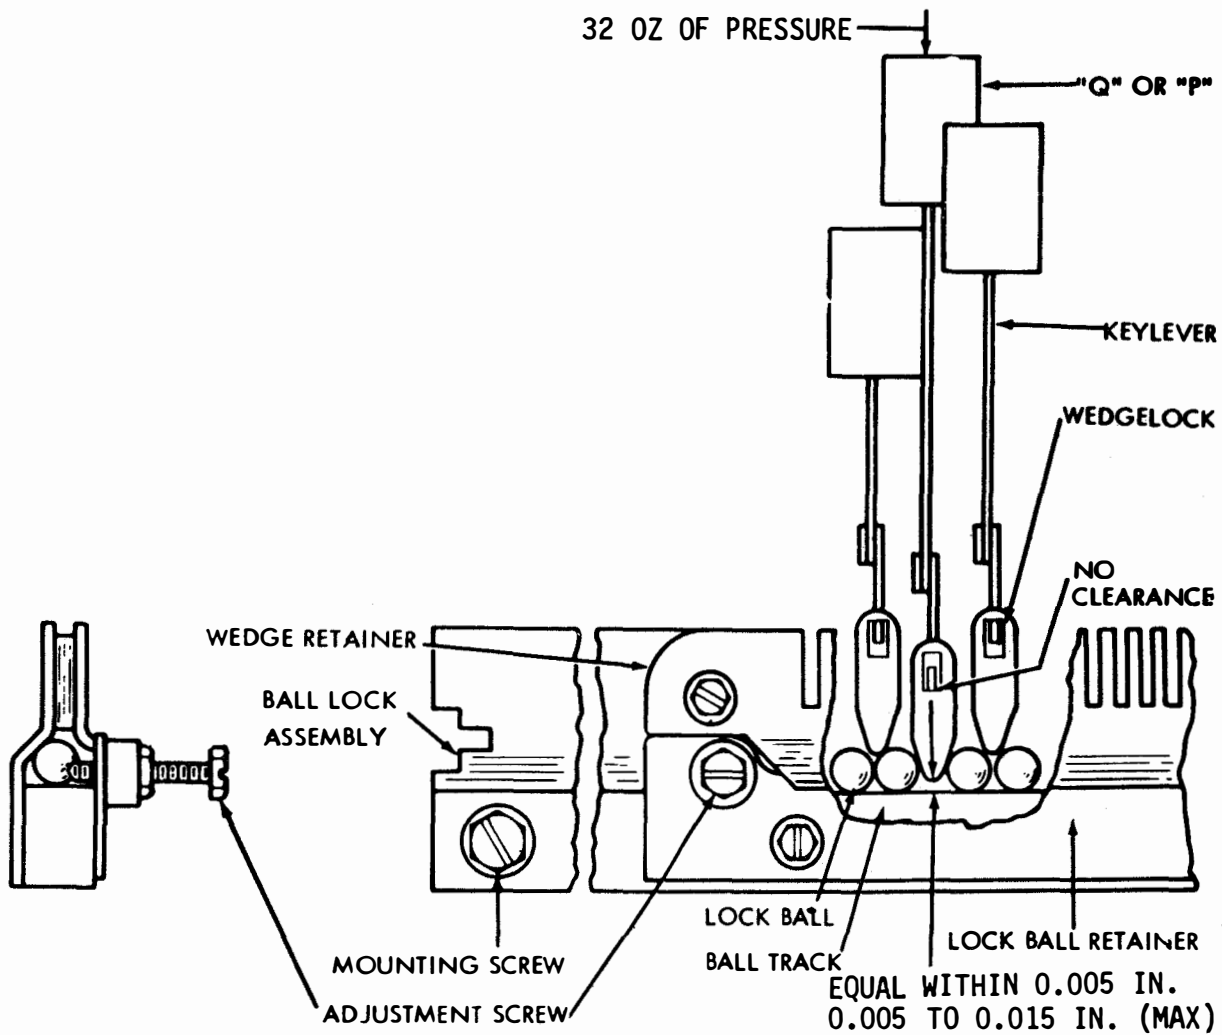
Ball Wedgelock and Ball Track Clearance (Preliminary)
